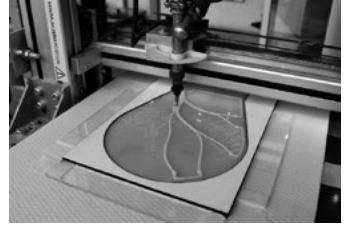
Printing a module using the PEM technique (Paste Extrusion Modelling).
